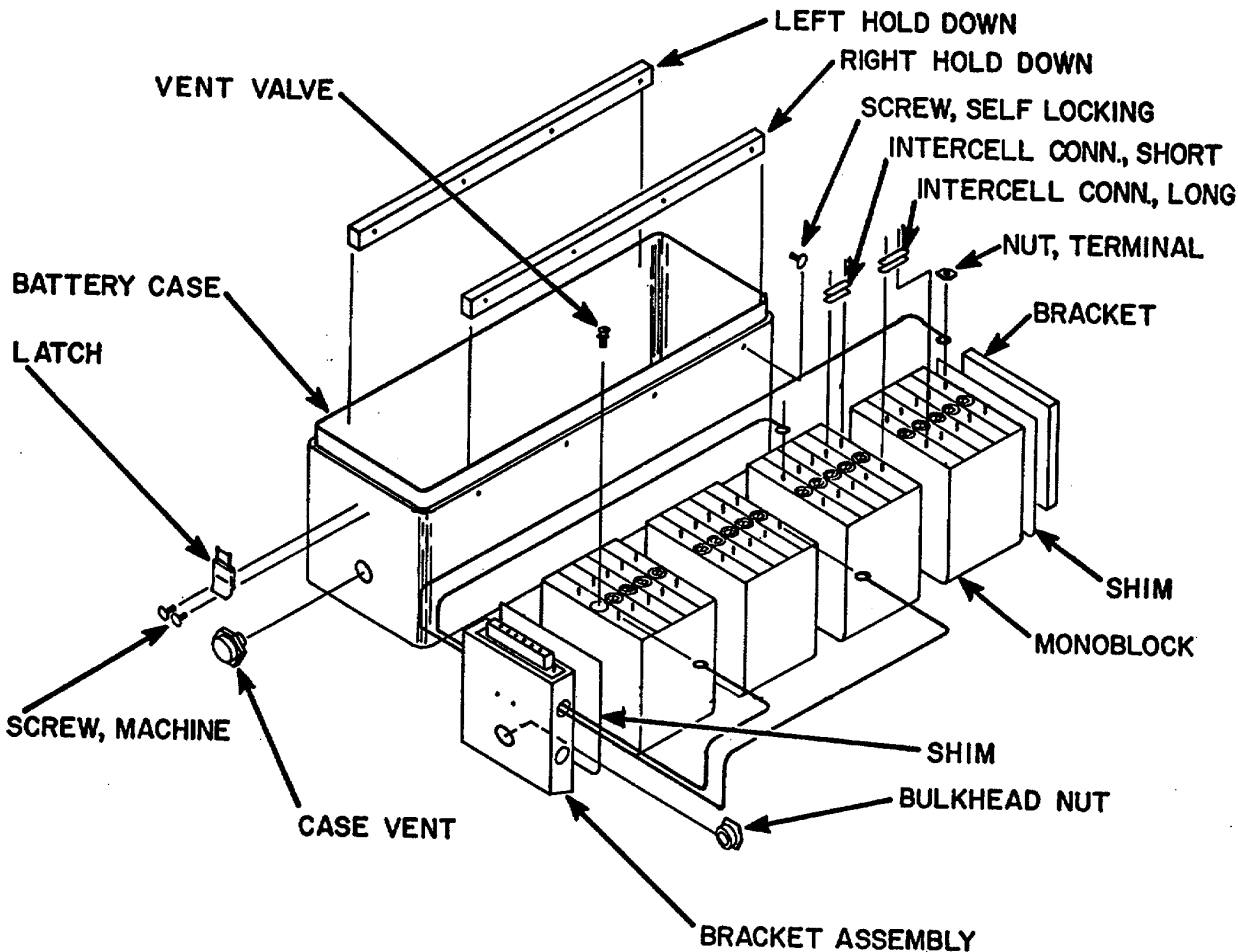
Battery, Storage BB-651/U, Exploded View
